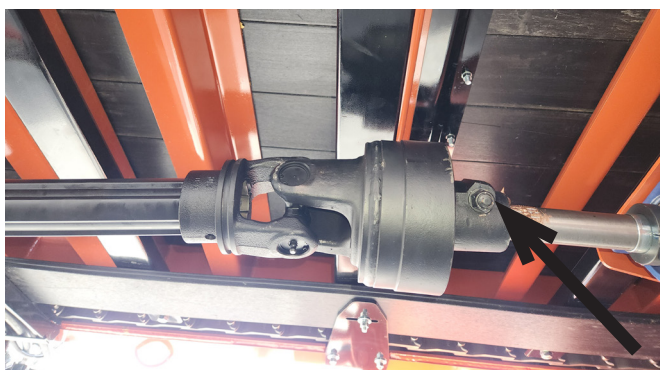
The rear PTO shaft should not be frequently removed. To secure the rear PTO tapered pin on the tractor side connection, tighten the nut on the PTO connected to the 1-3/8" diameter 21 T splined shaft to 110 ft-lb of torque.
